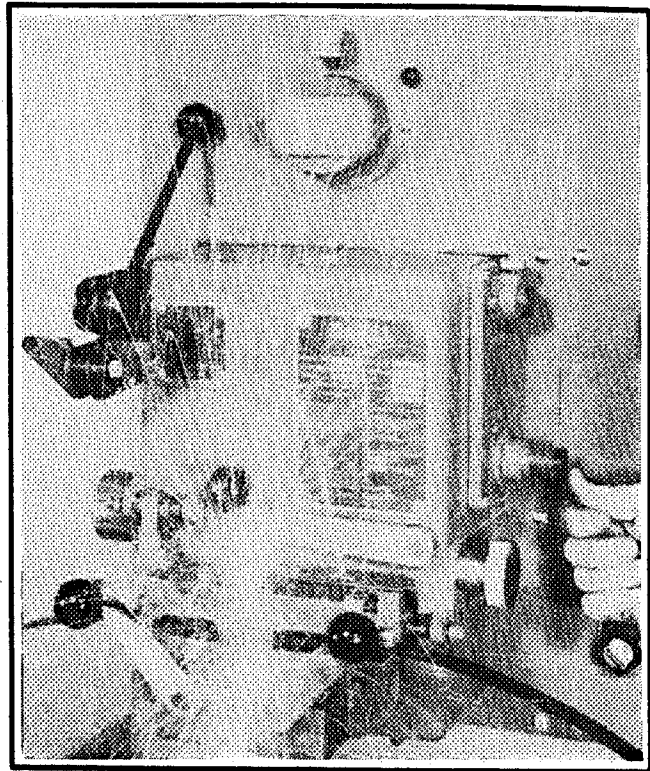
WELDING ONE-HALF-INCH BAND.
